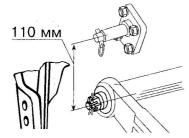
3-point hitch hanger installed in the bean-shaped opening.
